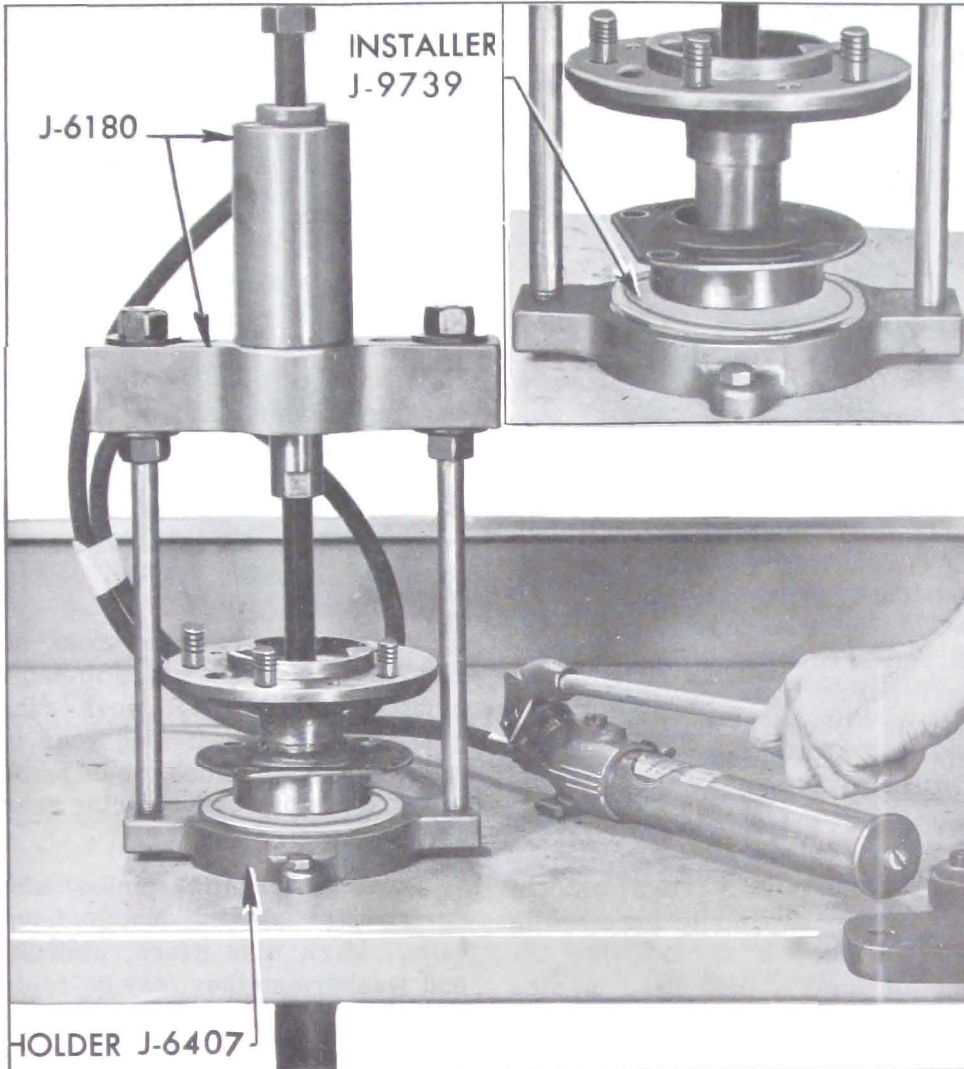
Installing Rear Wheel Bearing or Retaining Ring
